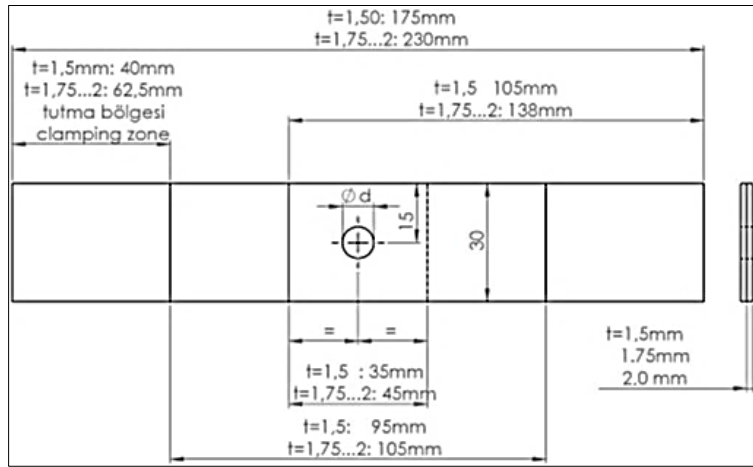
Joining dimensions for the friction stir spot welding of the test samples.
